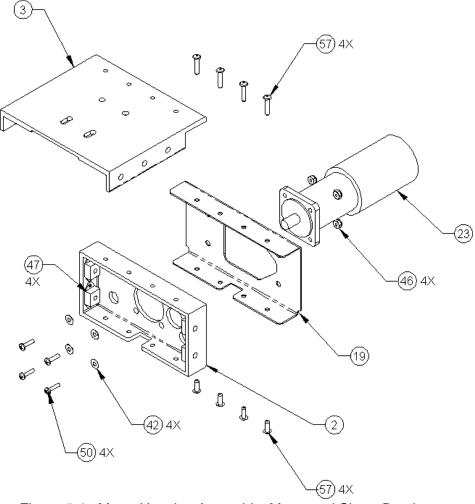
Motor Housing Assembly, Motor and Shear Bracket
